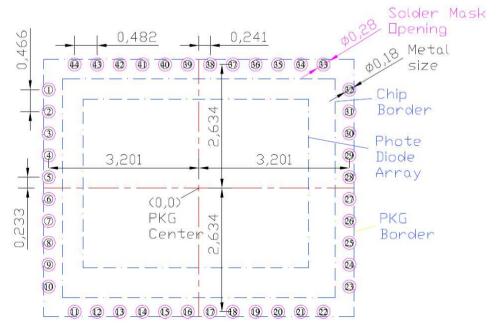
Recommended PCB land pattern (dimensions in mm), Pixel (0,0) is located on the top right corner of the pixel array here, close to pin 31.
